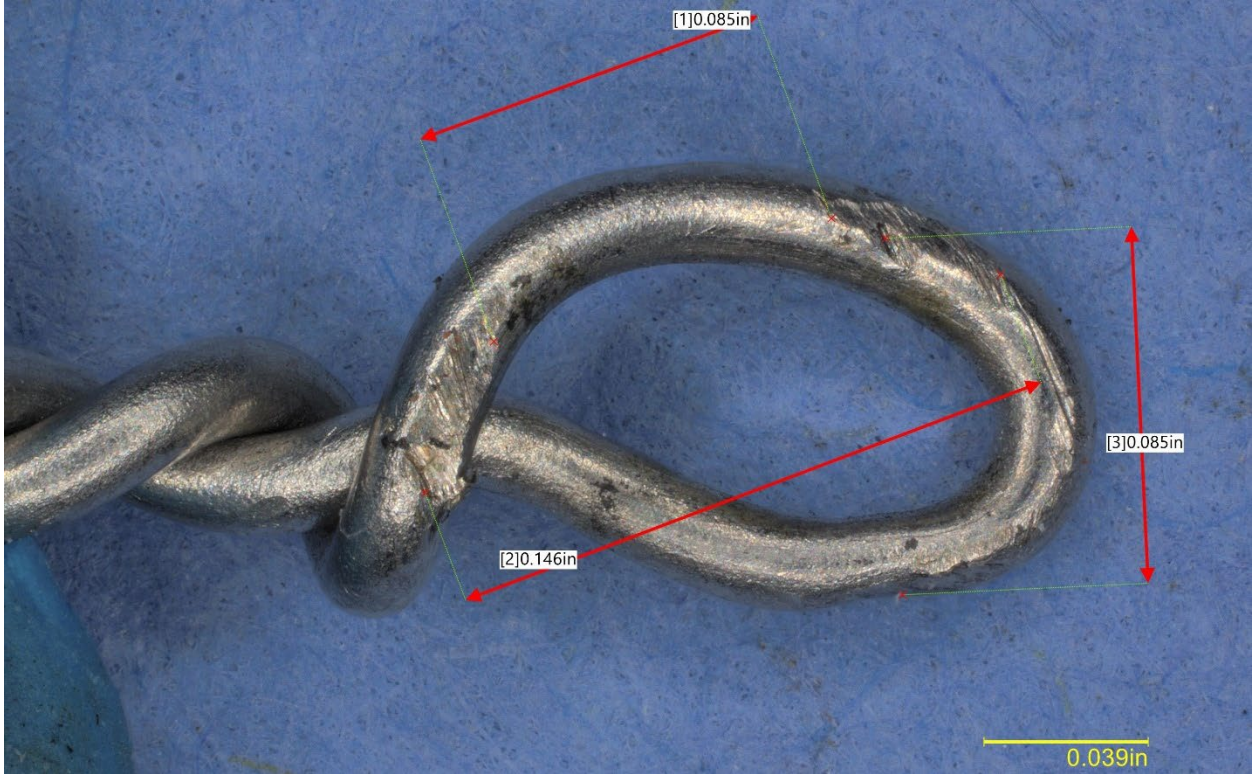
The fourth cut wire fracture surface, showing areas of smearing, pinching, and overstress.
